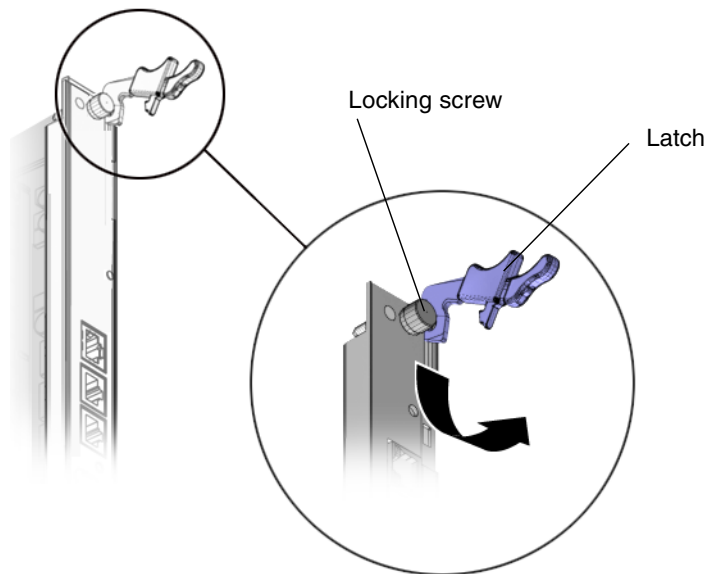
Injector/Ejector Latch and Locking Screw on the Netra CP3020 Board
